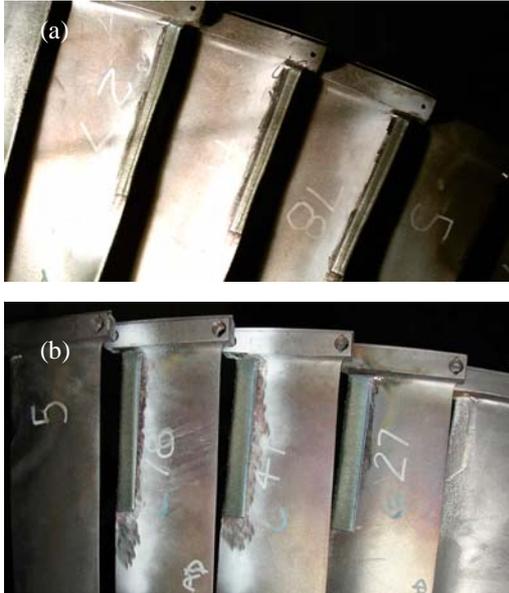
Laser clad blades showing (a) front view and (b) rear view before processing to original profile.
